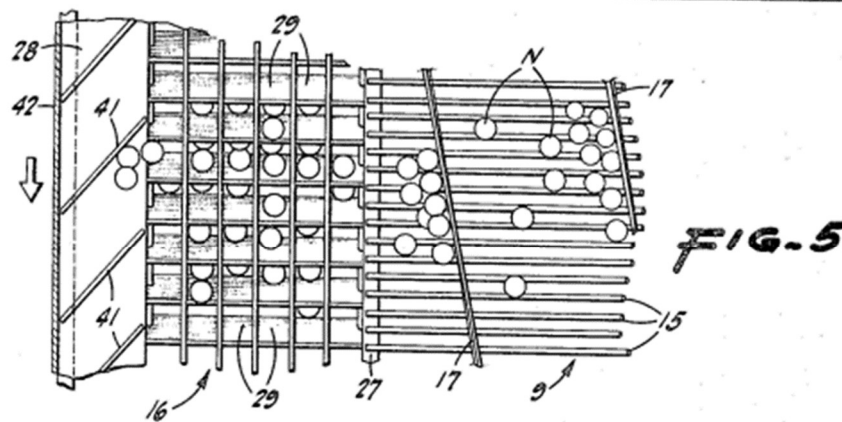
Trommel-Type Produce Cleaning Machine Sectional Flighting
